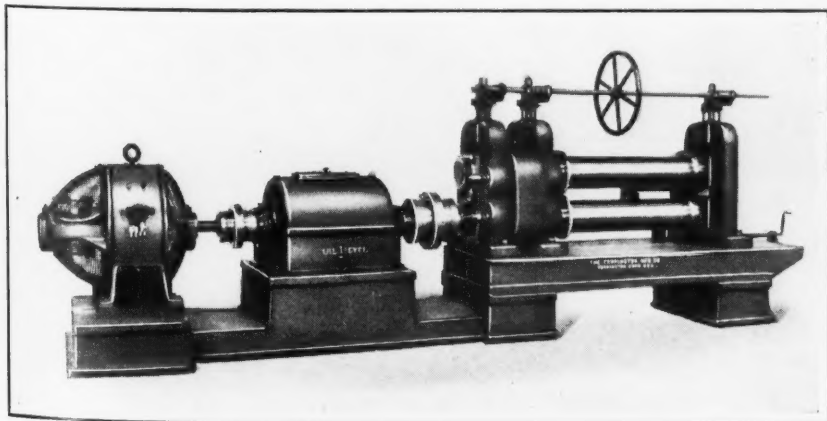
Torrington Slitting Machine which may be Used in Combination with the Machine Shown in Fig. 2, or Separately
